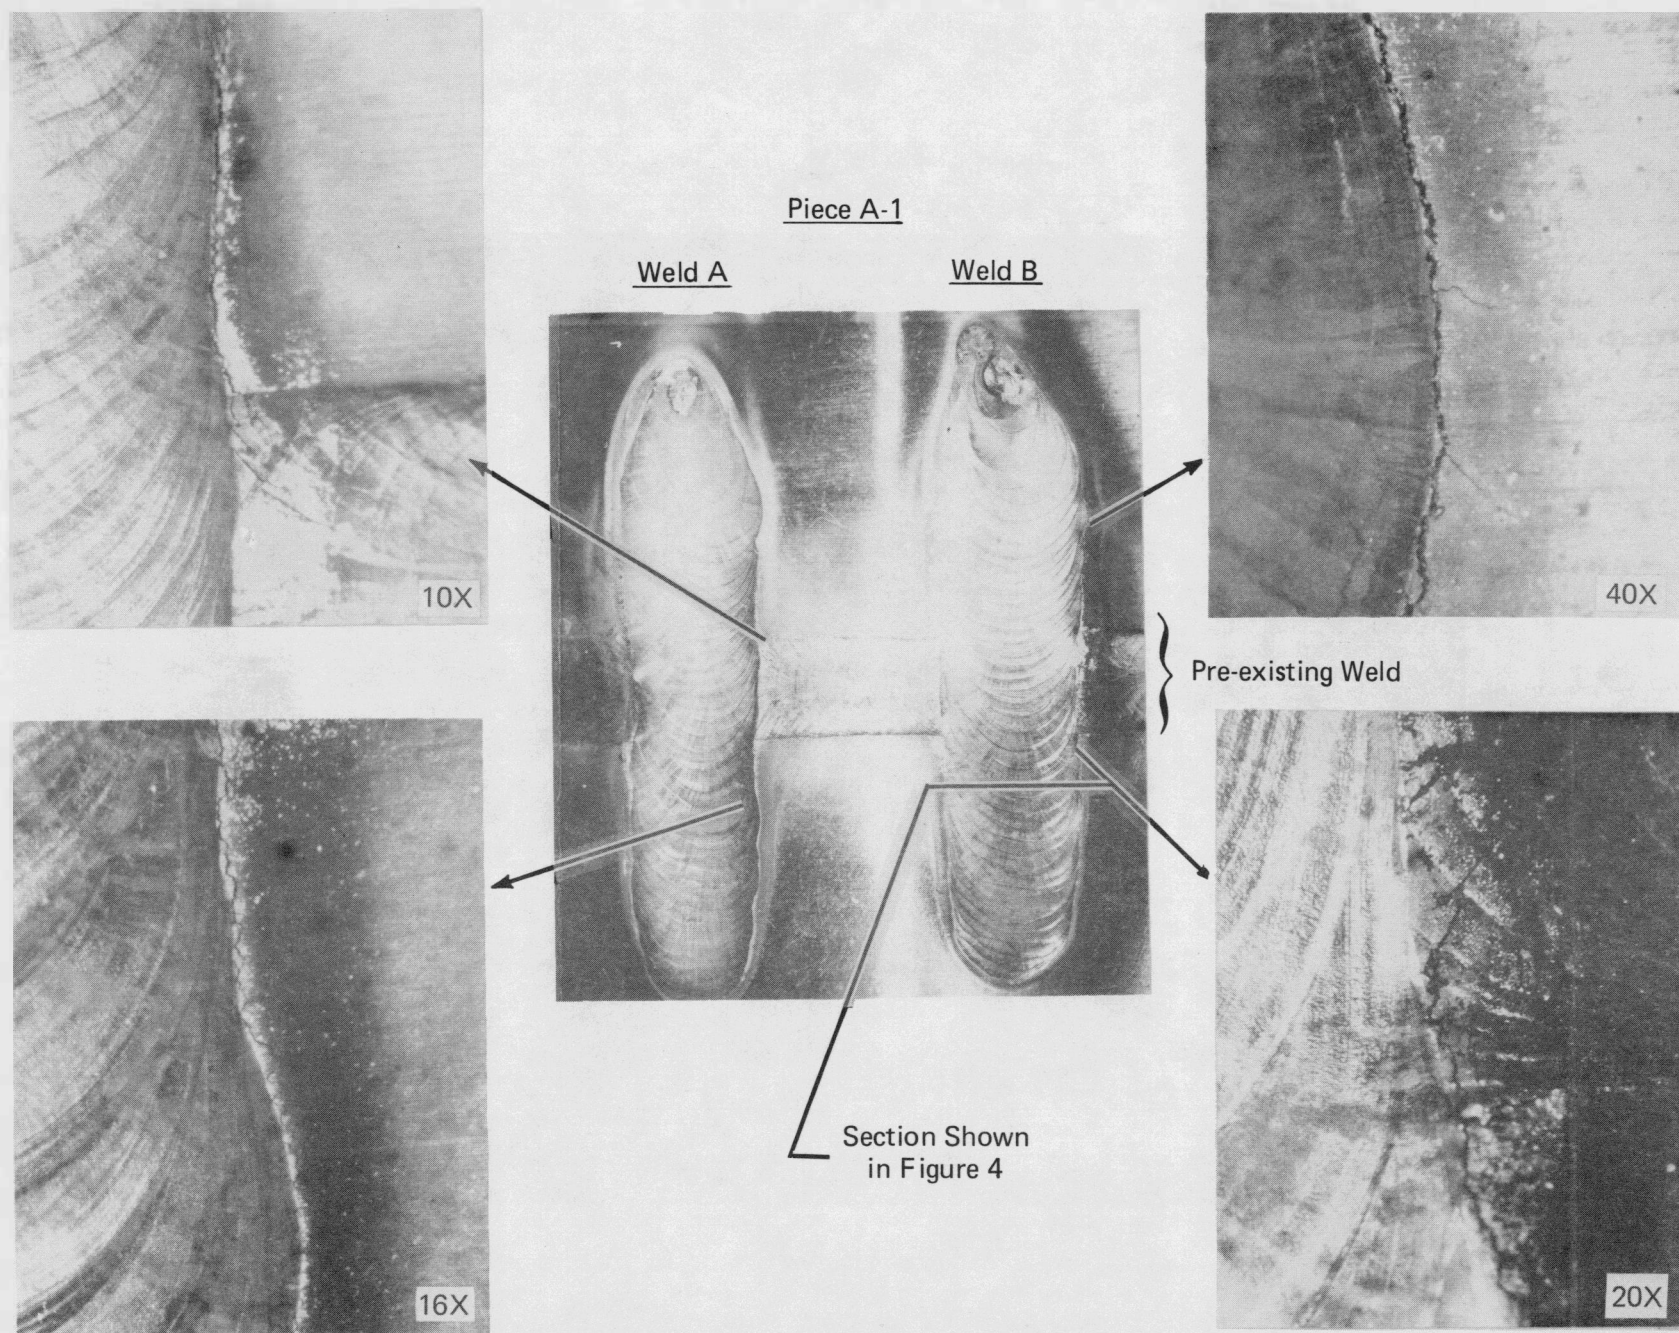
Toe Cracks Produced at C-Tank Welding Conditions, Piece A-1
